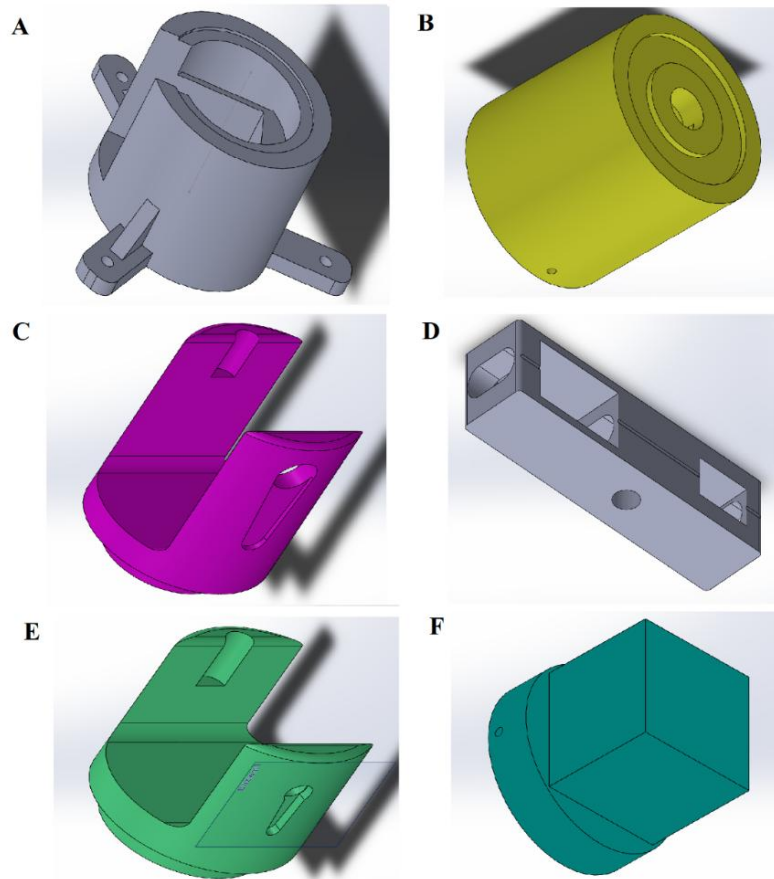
RRR robot arm component: A) Base, B) Arm 1, C) Joint 1, D) Arm 2, E) Joint 3 and F) Load. The robotic arm given in Figure 4 was formed by assembling with the designed and solid model components. The mounting points are connected by pins. Pin stiffness is given as the holding torque of the servo motors in the joints.
